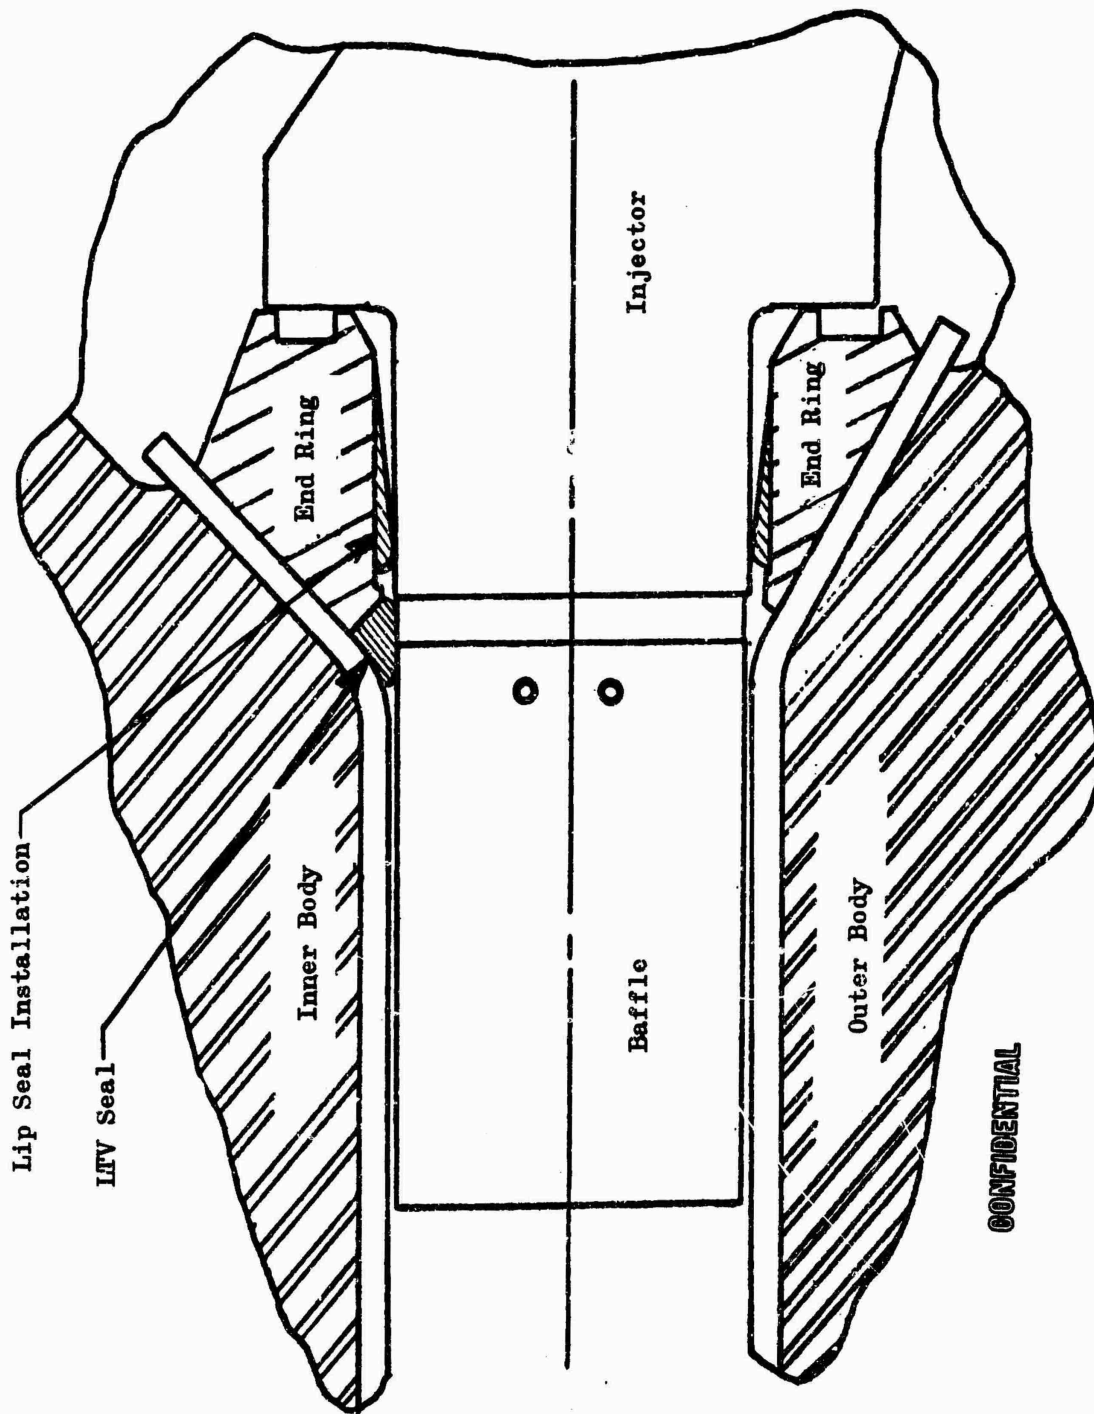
Cross-Sectional View of Injector Installation in Tube-Wall Thrust Chamber
